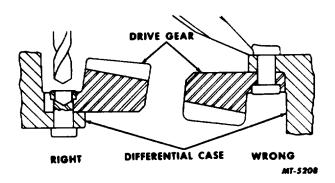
Drive Gear Rivet Removal Remove Pinion And Cage From Diff Carrier
